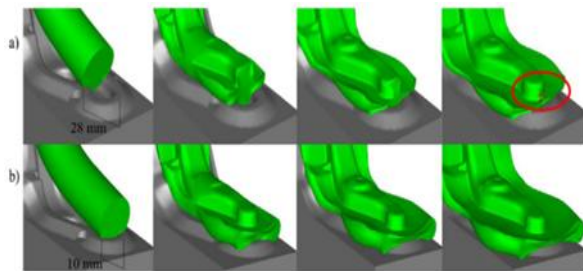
Filling the mold and forming the piece by jforge 2011[9]
